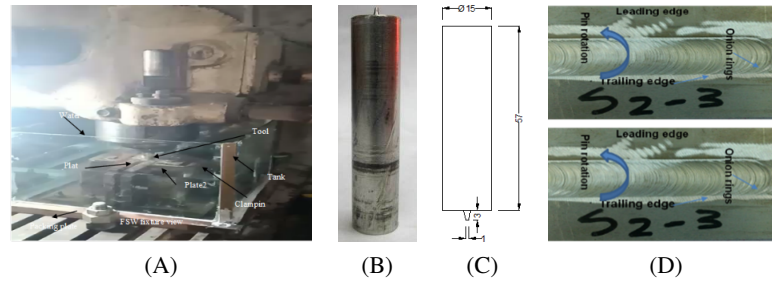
Schematic representation of UWFSW (A) UWFSW welding fixture. (B) Photo of a tool (C) tool dimension (D) specimens of 6061/18% SiC AMC
